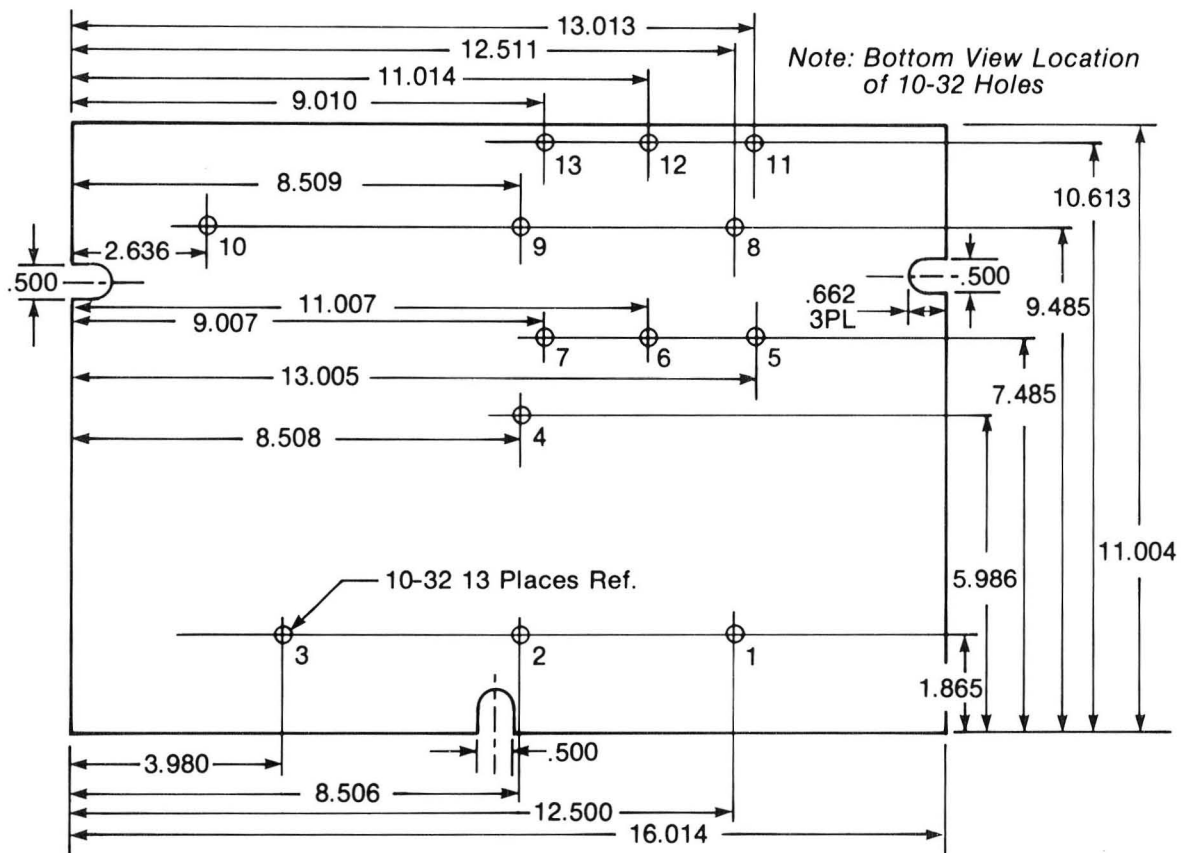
Outline Drawing of GE 5BY436A1 Motor
